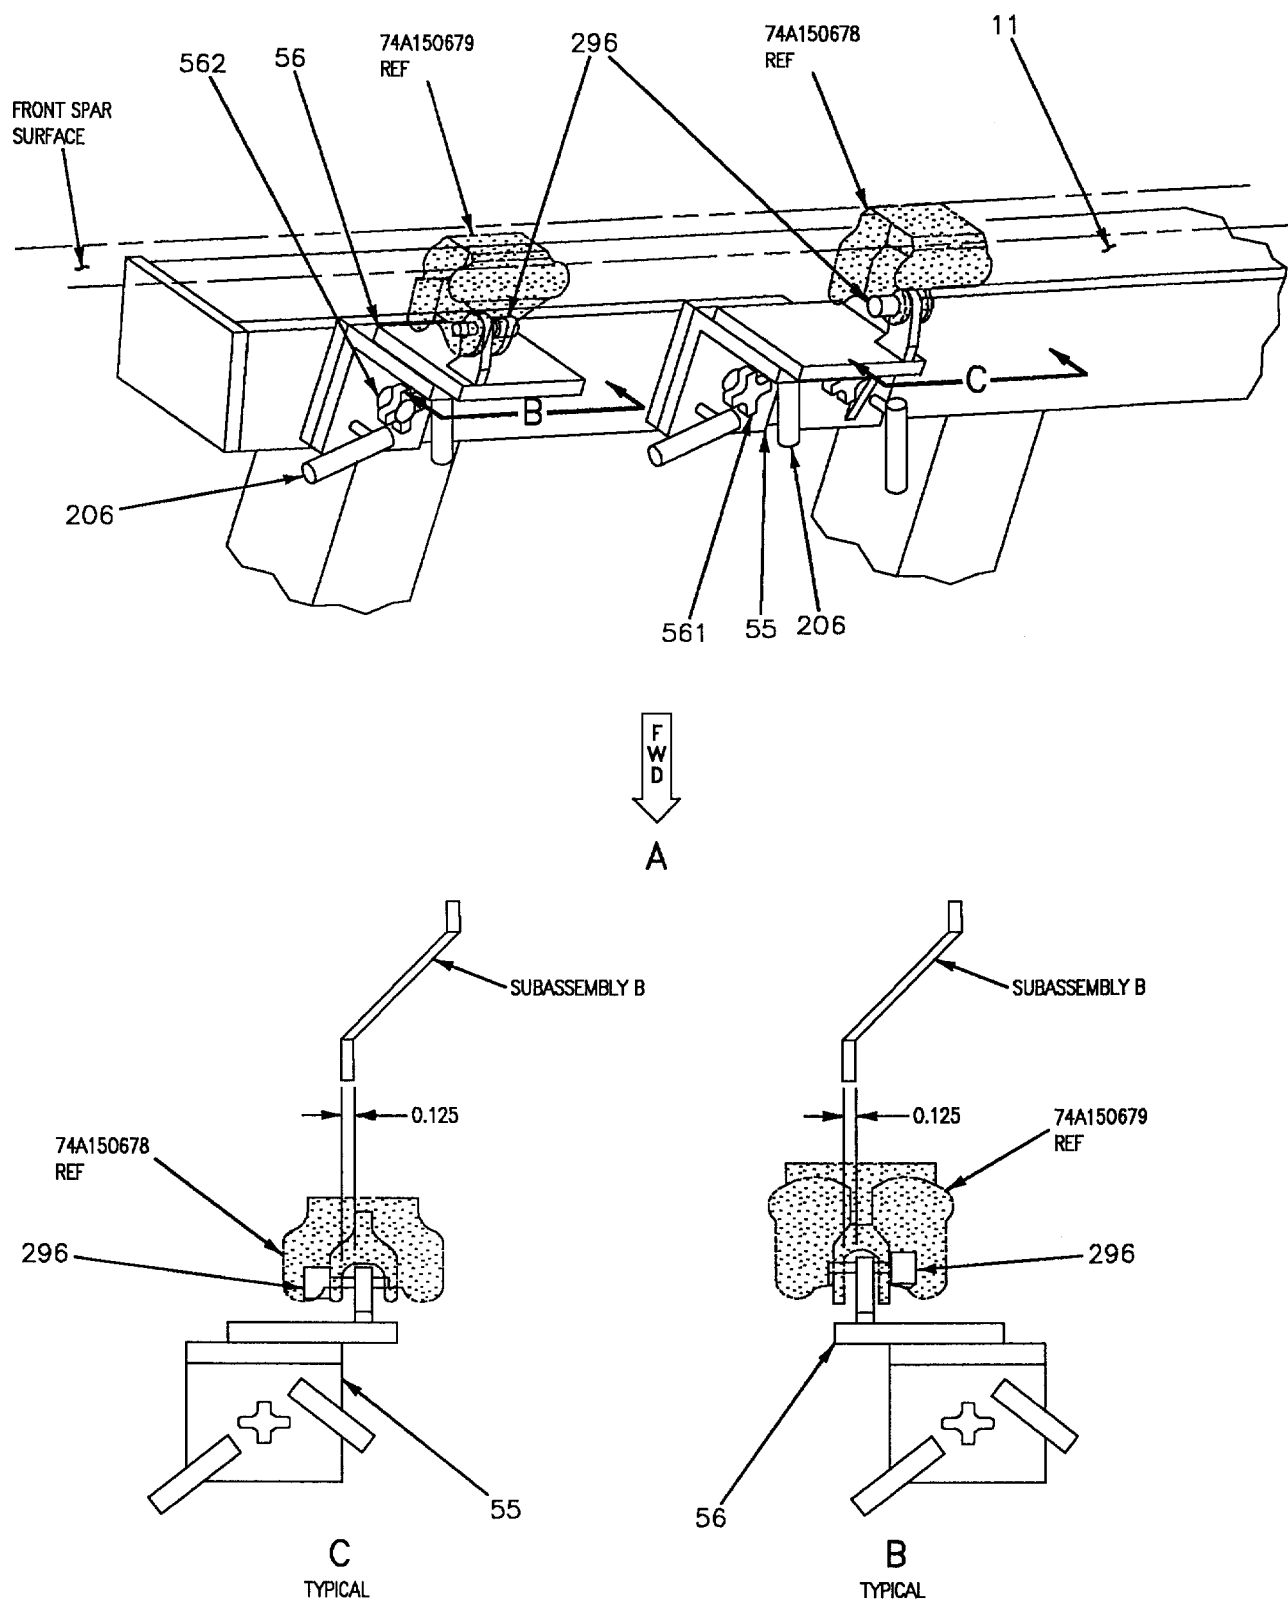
Leading Edge Flap Hinge Half Assemblies (Sheet 1)
